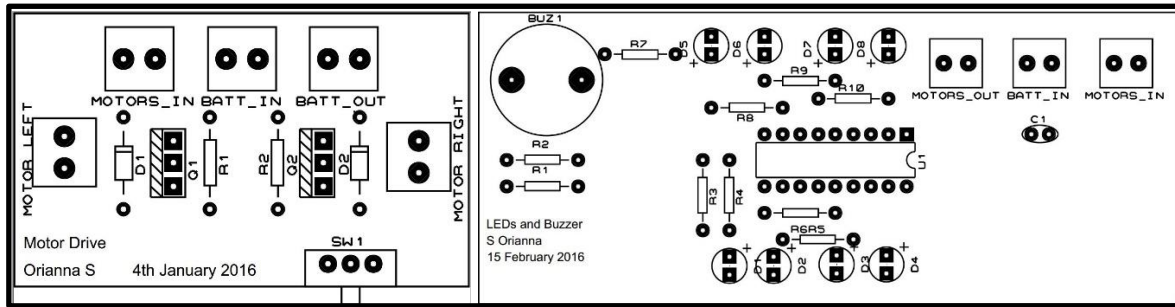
Final component-layouts used for PCB 2 (designed by C. Benjamin) and PCB 3.
